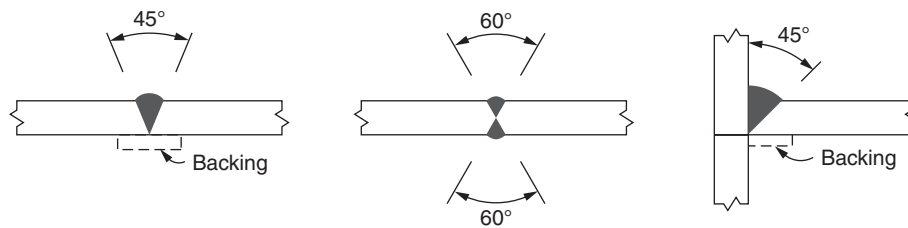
Complete joint penetration groove welds.
